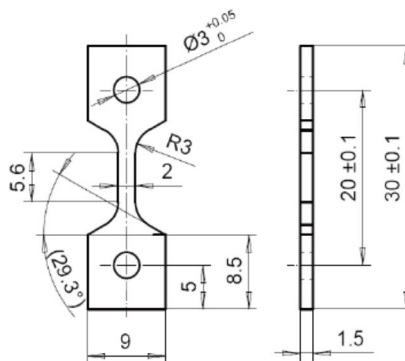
Geometry and dimensions (in mm) of the SSRT specimens.
